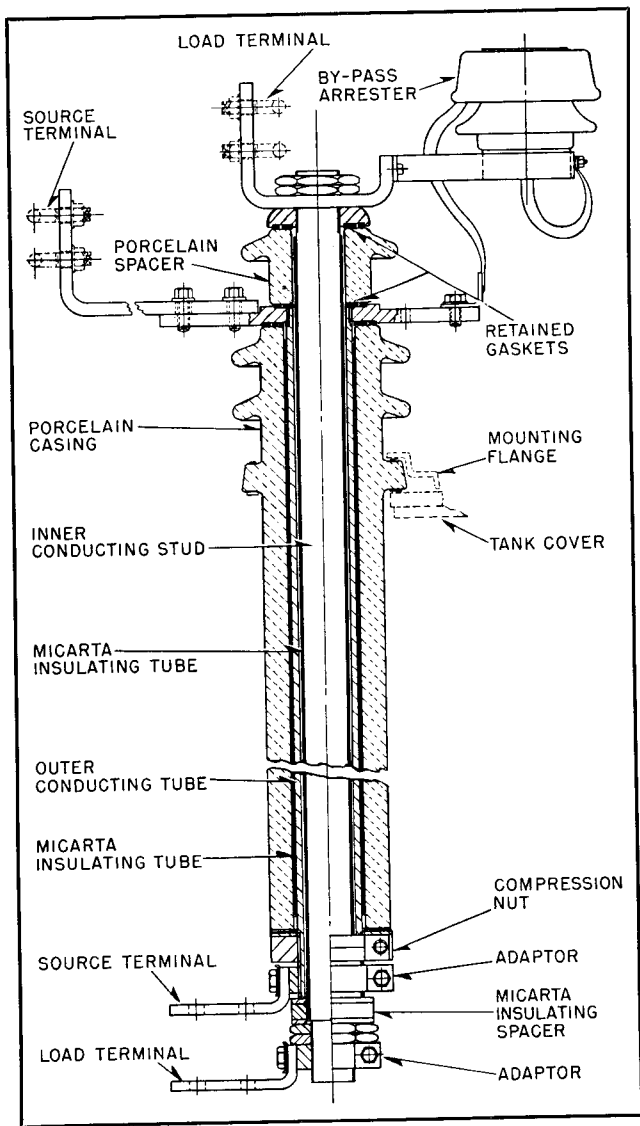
Concentric Lead Bushing for Type URS Step Regulator
